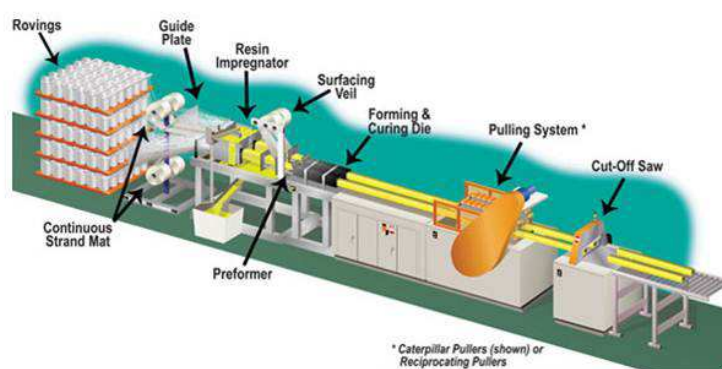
Pultrusion machine scheme, Source: Strongwell.
